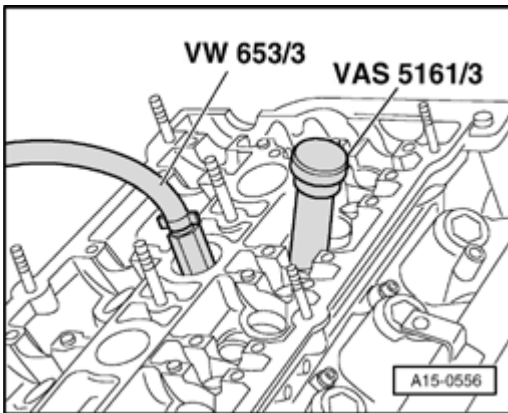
Identifying Pressure Hose VW653/3 Into Spark Plug Thread & Drift VAS5161/3 In Valve Lifter Guide
